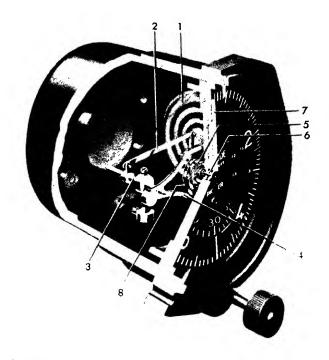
A cutaway view of an altimeter. (1) Diaphragm assembly; (2) a link; (3) rocking shaft; (4) a sector; (5) pinion; (6) tapered hand staff; (7) pointer; (8) hairspring. (Courtesy Eclipse Pioneer Division, Bendix Aviation Corporation)
